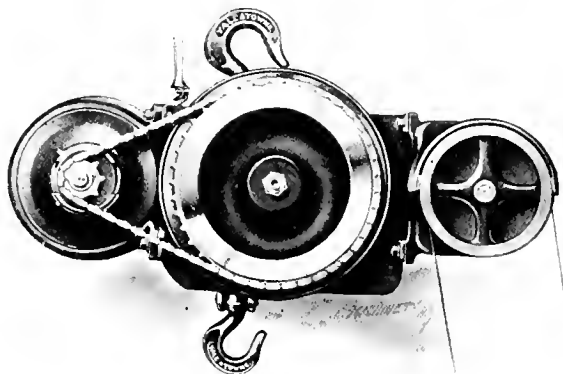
End View showing Auxiliary Hand Chain Drum.
